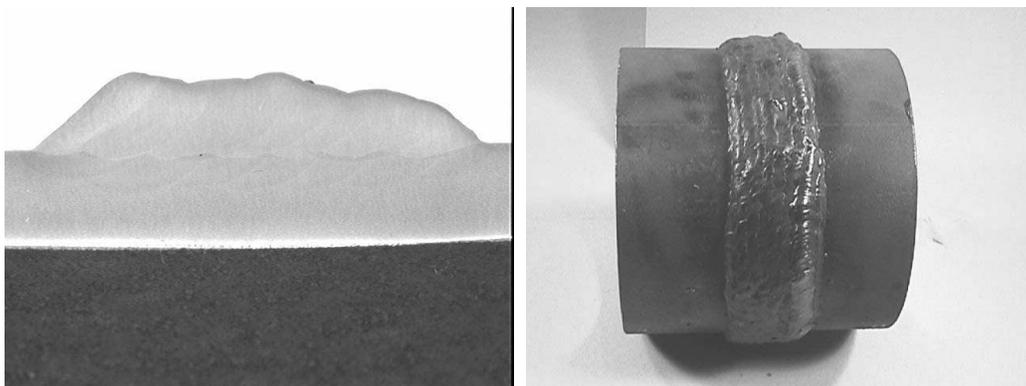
Overlay weld specimen with the SMAW process.
